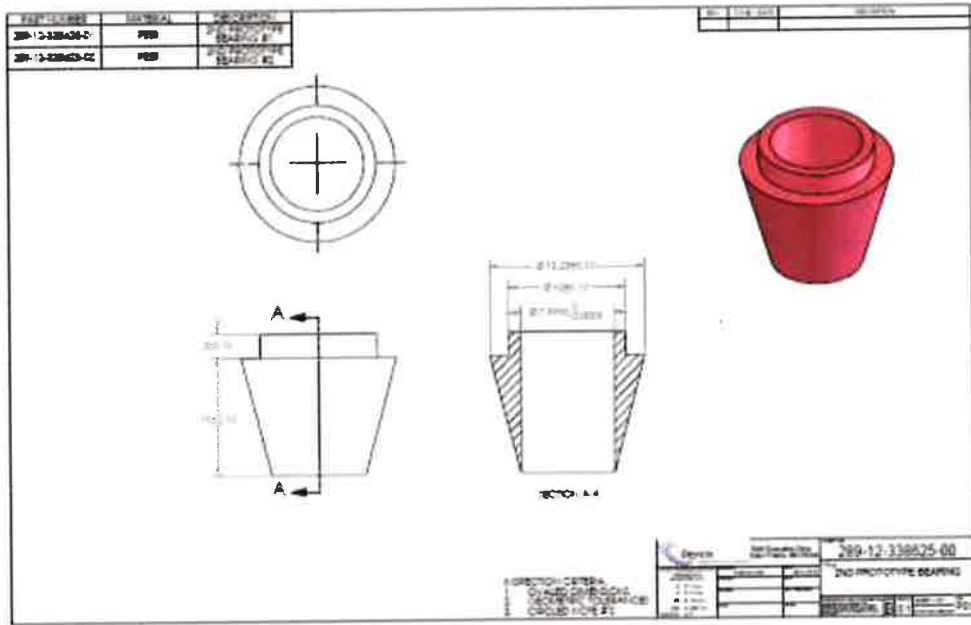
The 13.25mm conical bearing will be used in conjunction with a 14mm reamer head. This design allows for 3.25mm of lateral cutting.
